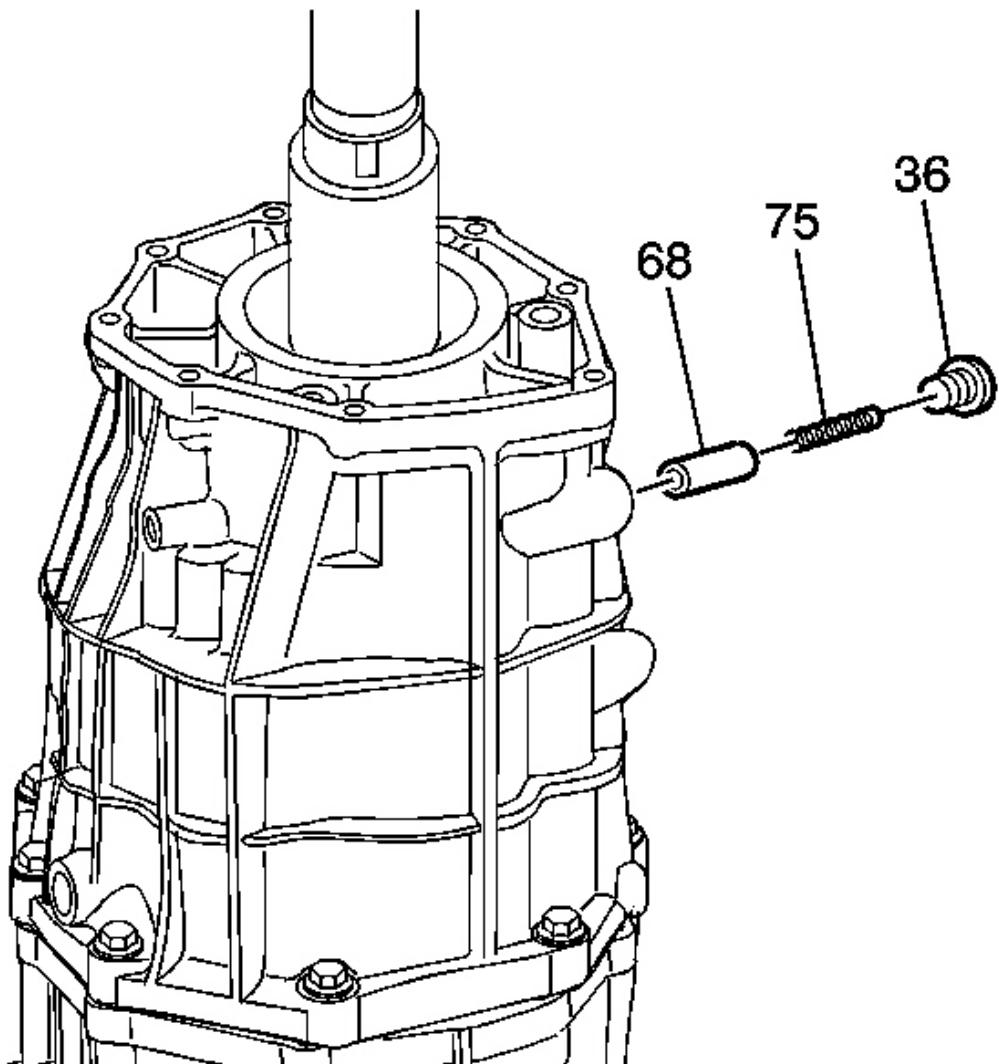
View Of Shift Shaft Detent Plug, Spring & Pin
